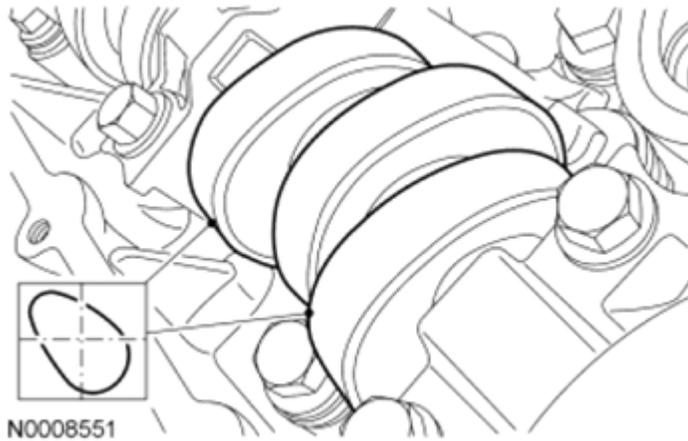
Locating Intake Camshaft Lobes And Exhaust Lobe On No. 1 Cylinder
